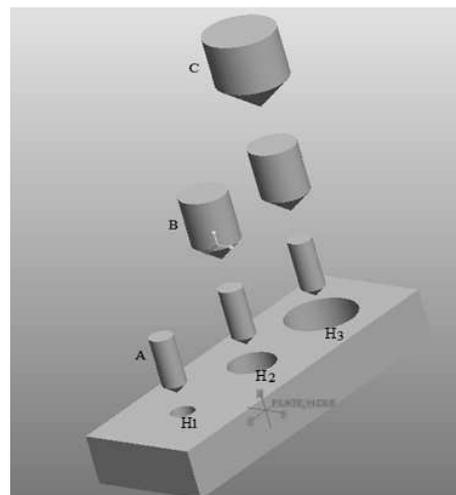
Image showing various tool combinations required to drill a hole on workpiece.
